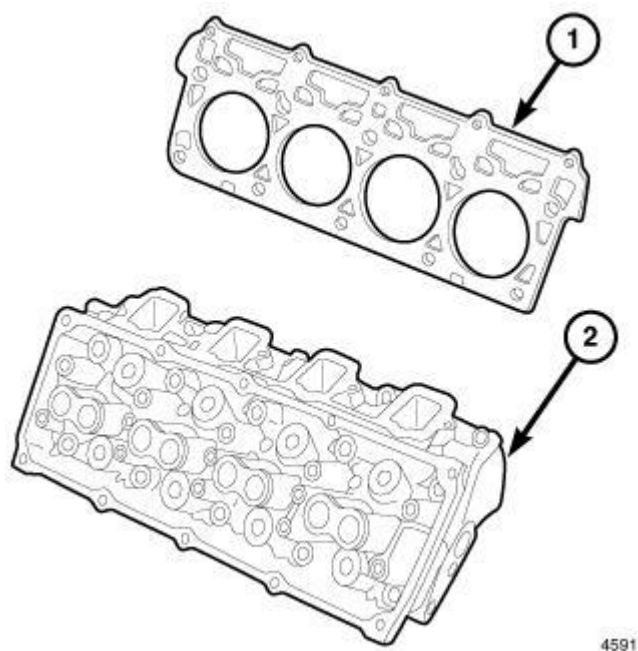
5.7L/6.1L CYLINDER HEAD COMPONENTS
